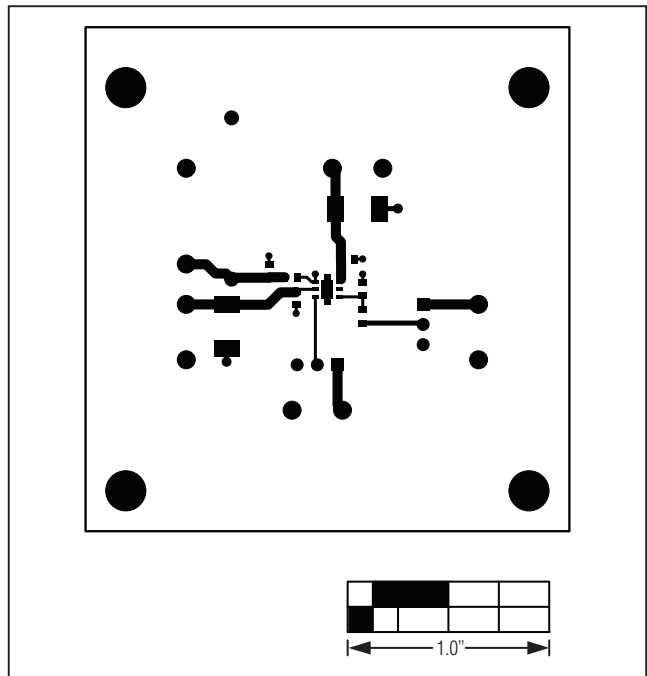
MAX9943 EV Kit PCB Layout—Component Side
